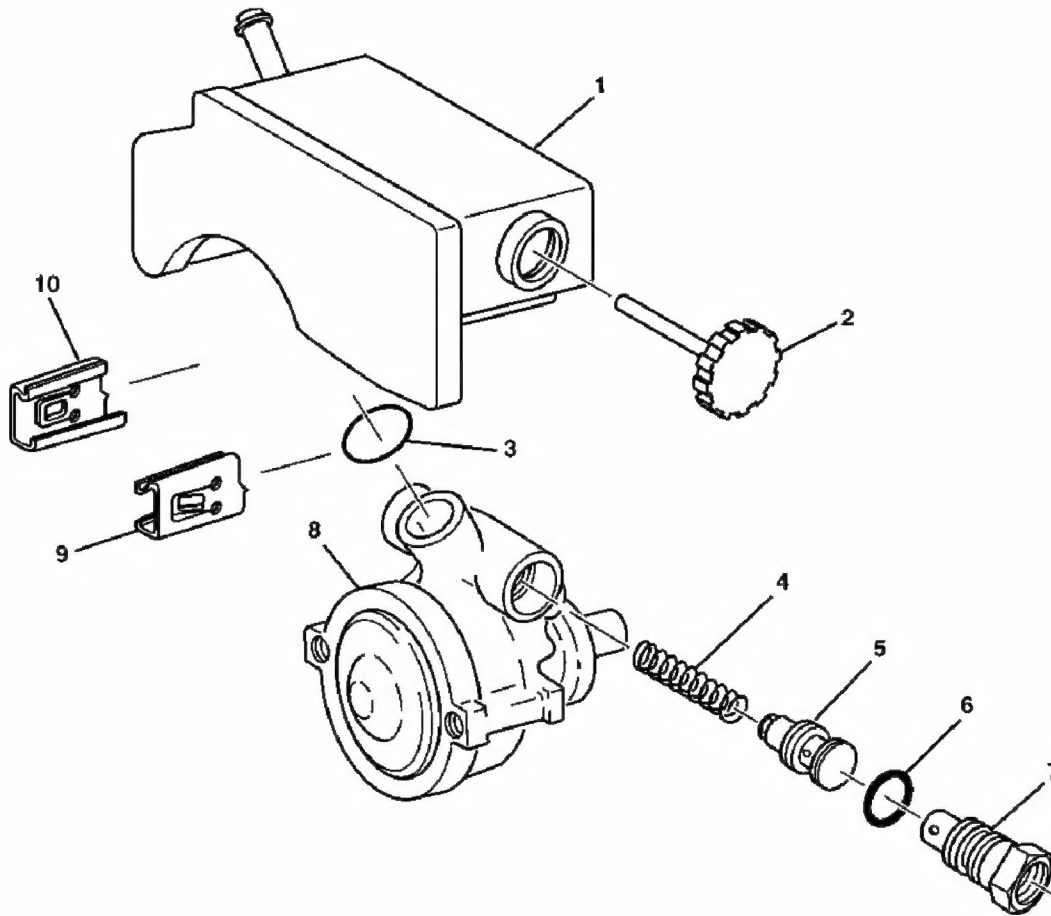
Exploded View Of Power Steering Pump Components (CB Series)
